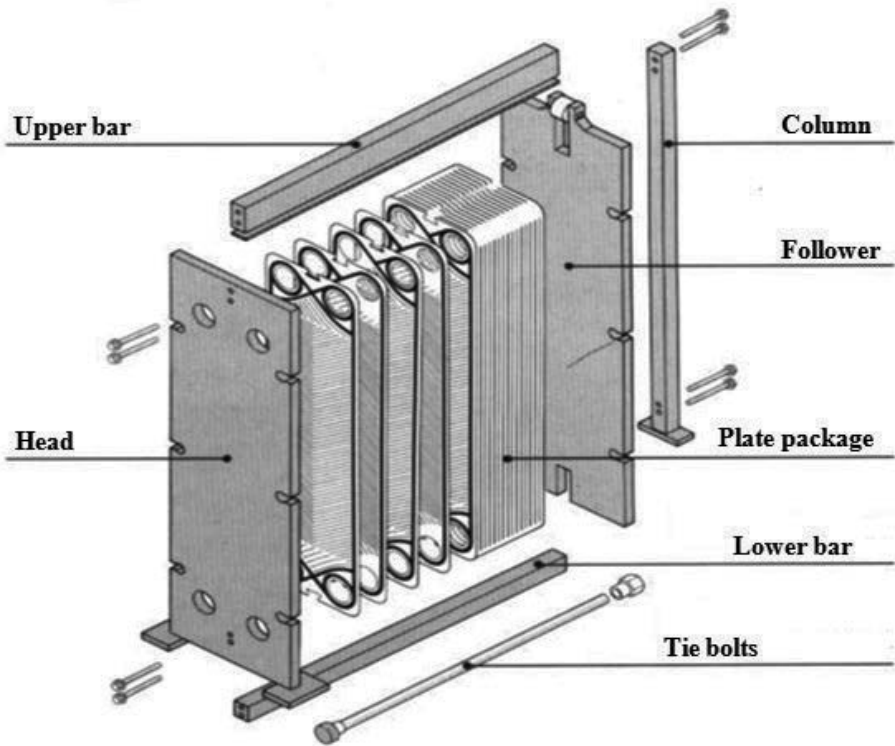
Exploded View of a Plate Heat Exchanger [2].
